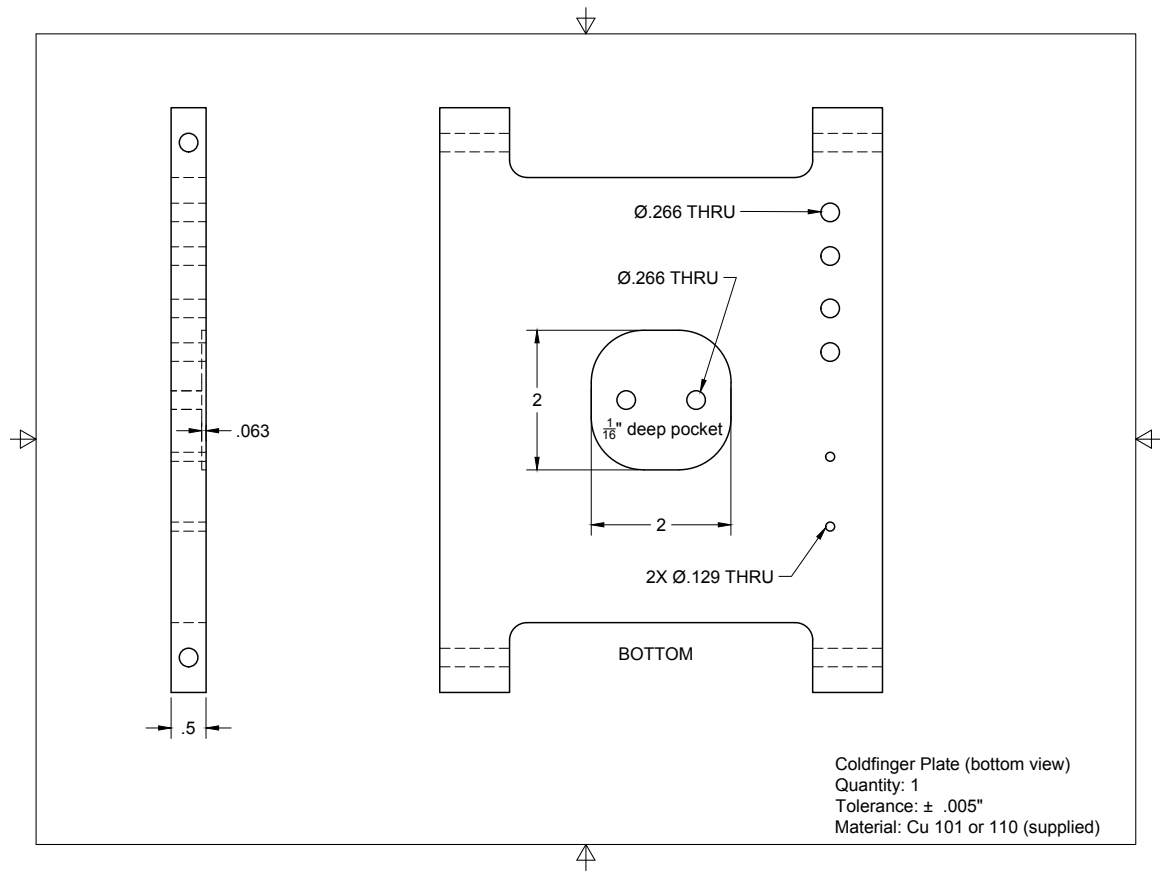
Machine drawing of coldfinger plate (bottom view).
